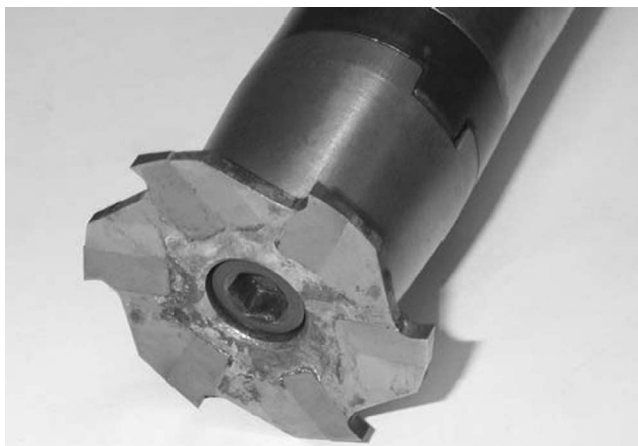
Finishing plunge cut for one side of corrugation.
